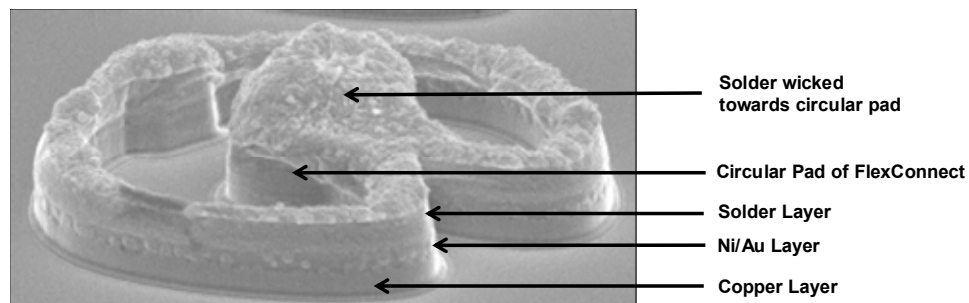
Solder Wicking towards Circular Pad of FlexConnect
